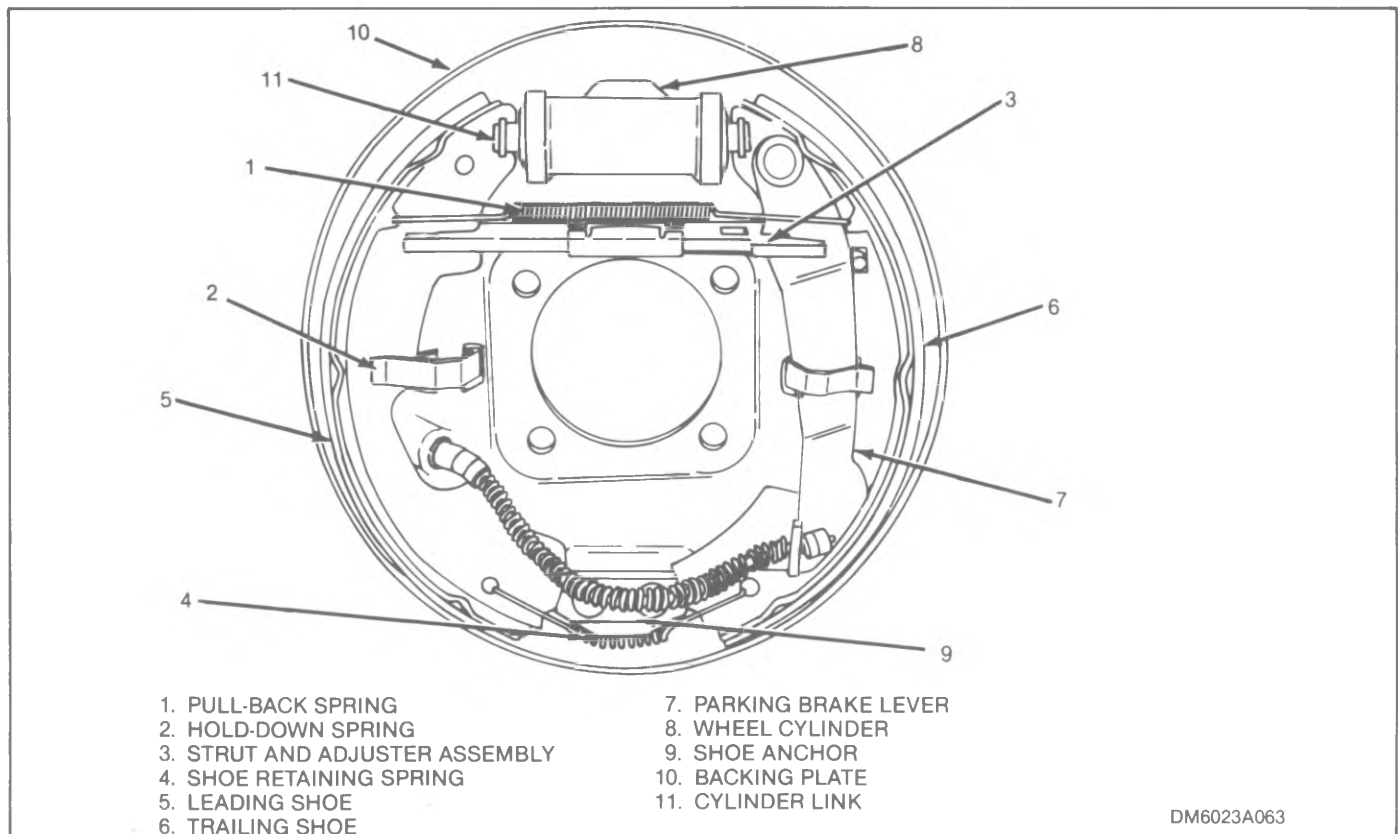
1975 and Prior Vega, Monza, Astre, Sunbird, Skyhawk and Starfire Leading-Trailing Drum Brake Parts
